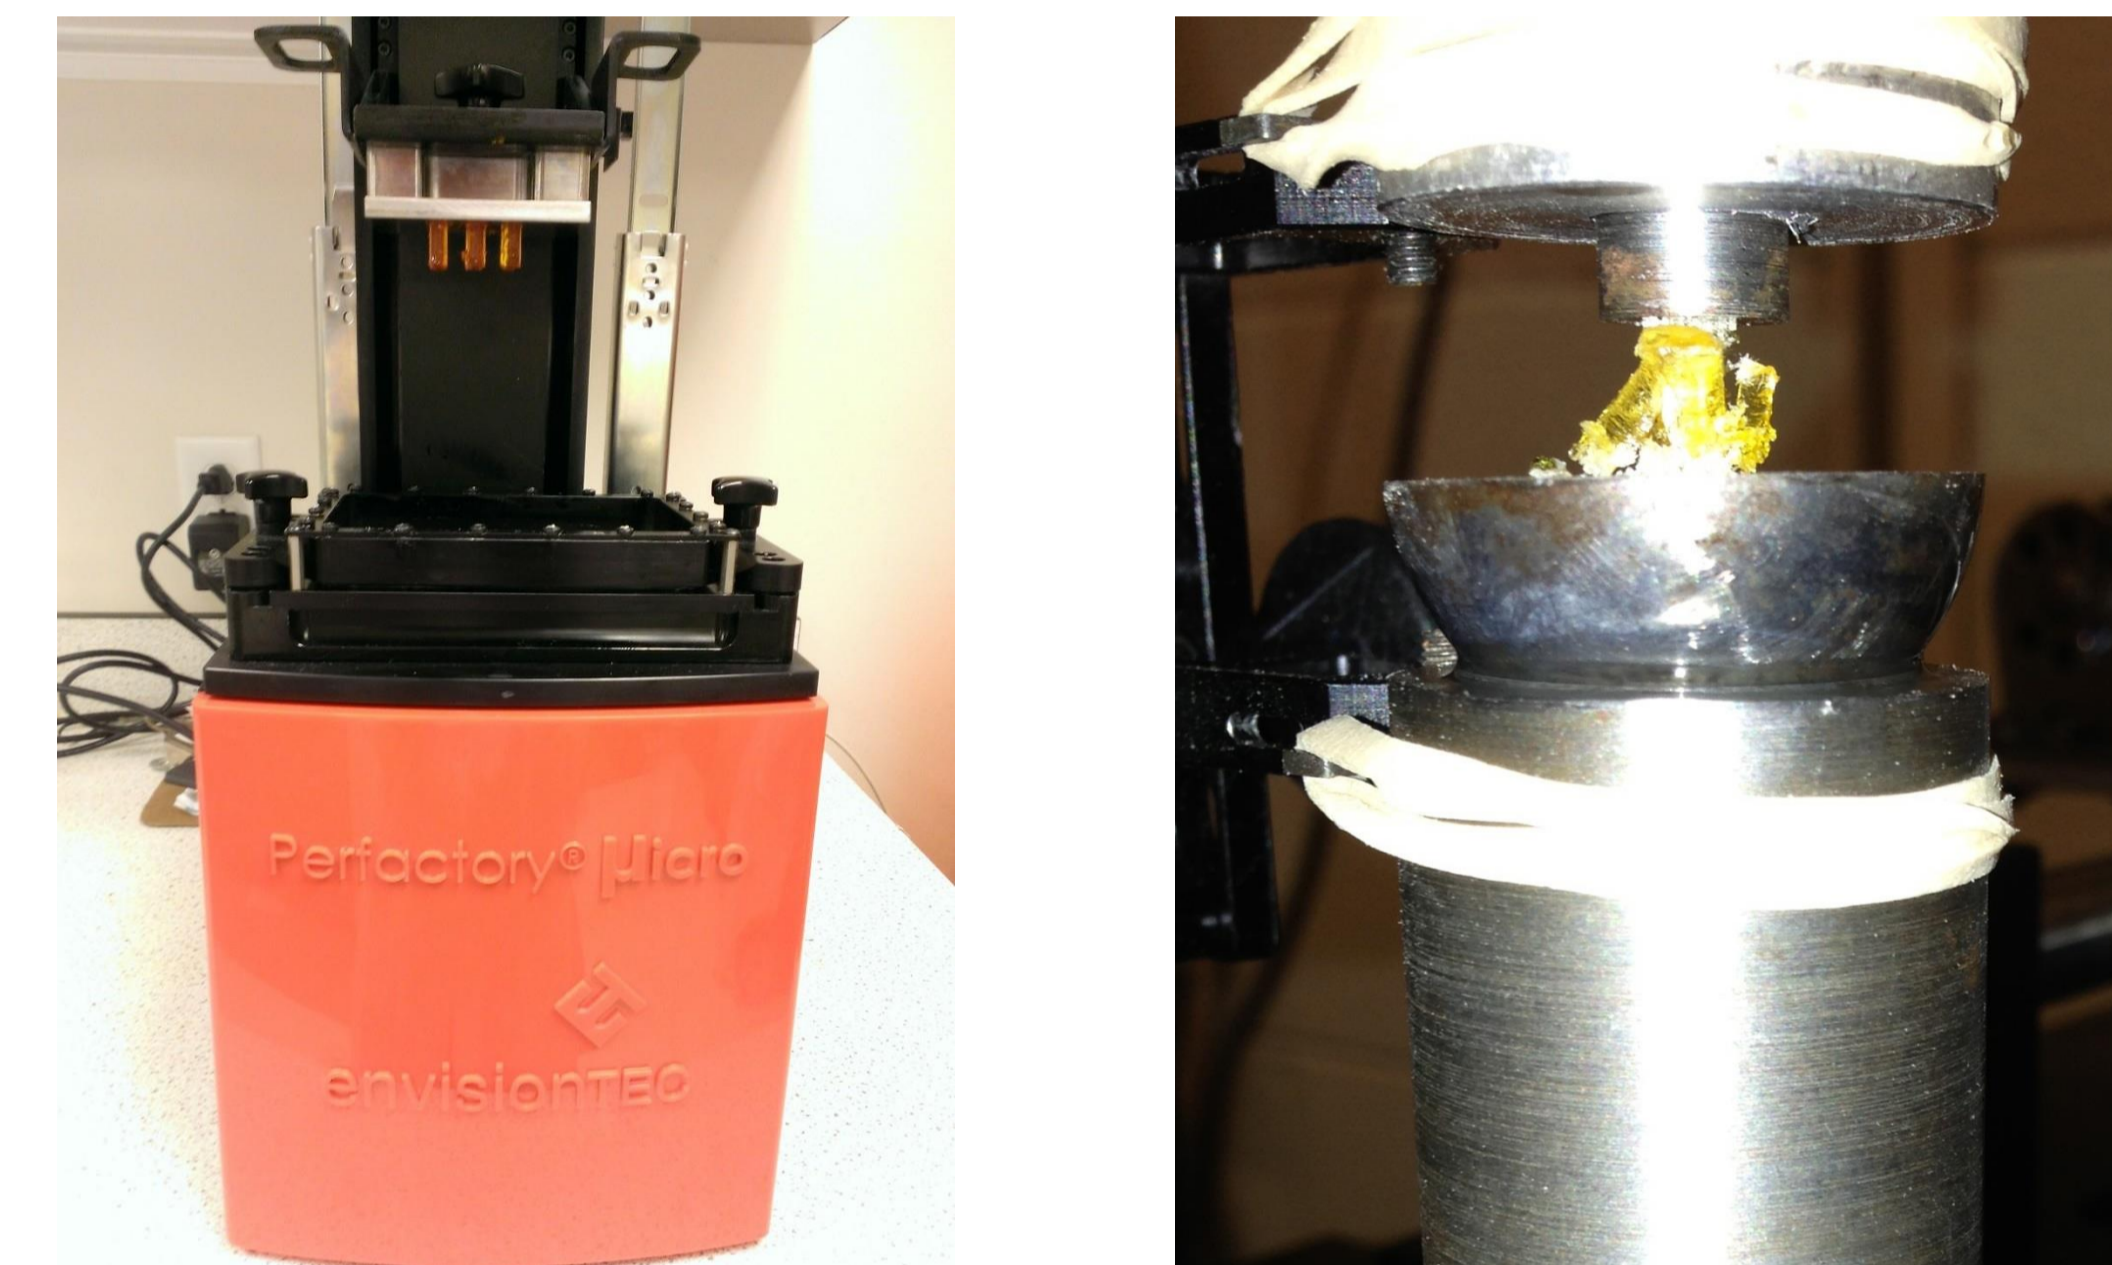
(a) Cylinder test specimens after being 3D printed in Perfactory Micro. (b) Specimen after being tested to failure under compression.
